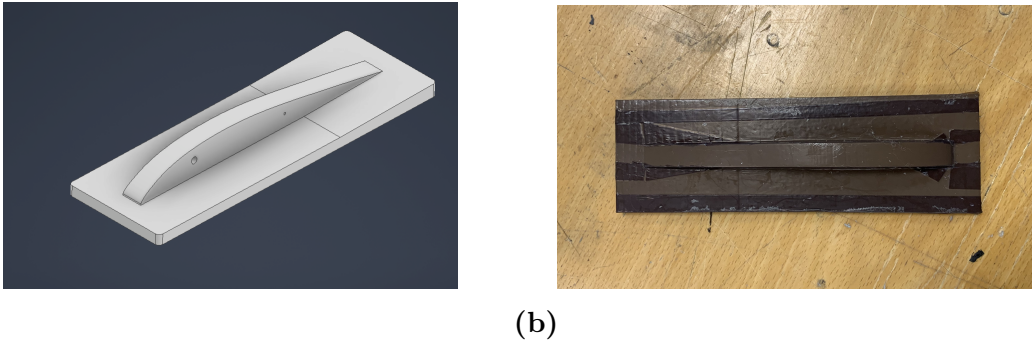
(a) CAD model of the wingbox mould, (b) 3D printed mould wrapped in PTFE tape for release properties.
